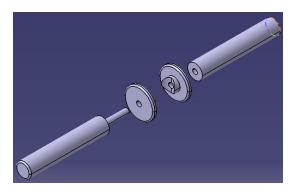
Handle Sub-Assembly. The sub-assembly of the handle clearly shows the connections between the threaded handle shaft, handle shaft, and both handle couplers.
